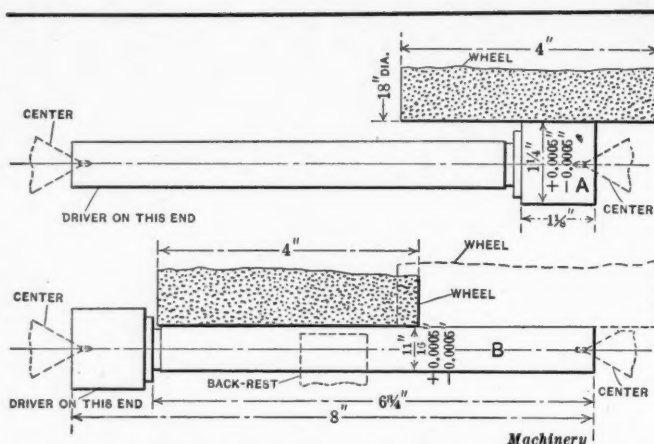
Finishing a Pinion Shaft by Means of Combined "Step-in," "Straight-in" and Traverse Methods of Grinding
